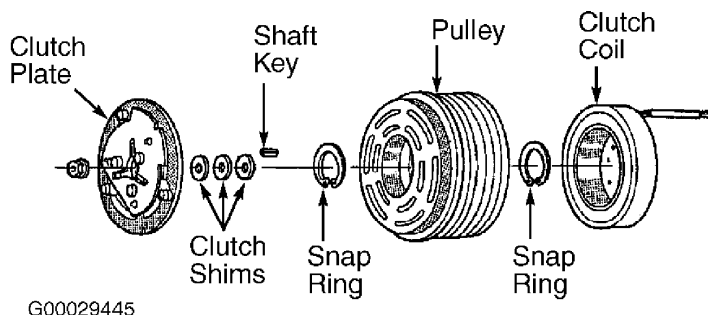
Exploded View Of Compressor Clutch Assembly (Nippondenso 10S15/10S17/10S20)
